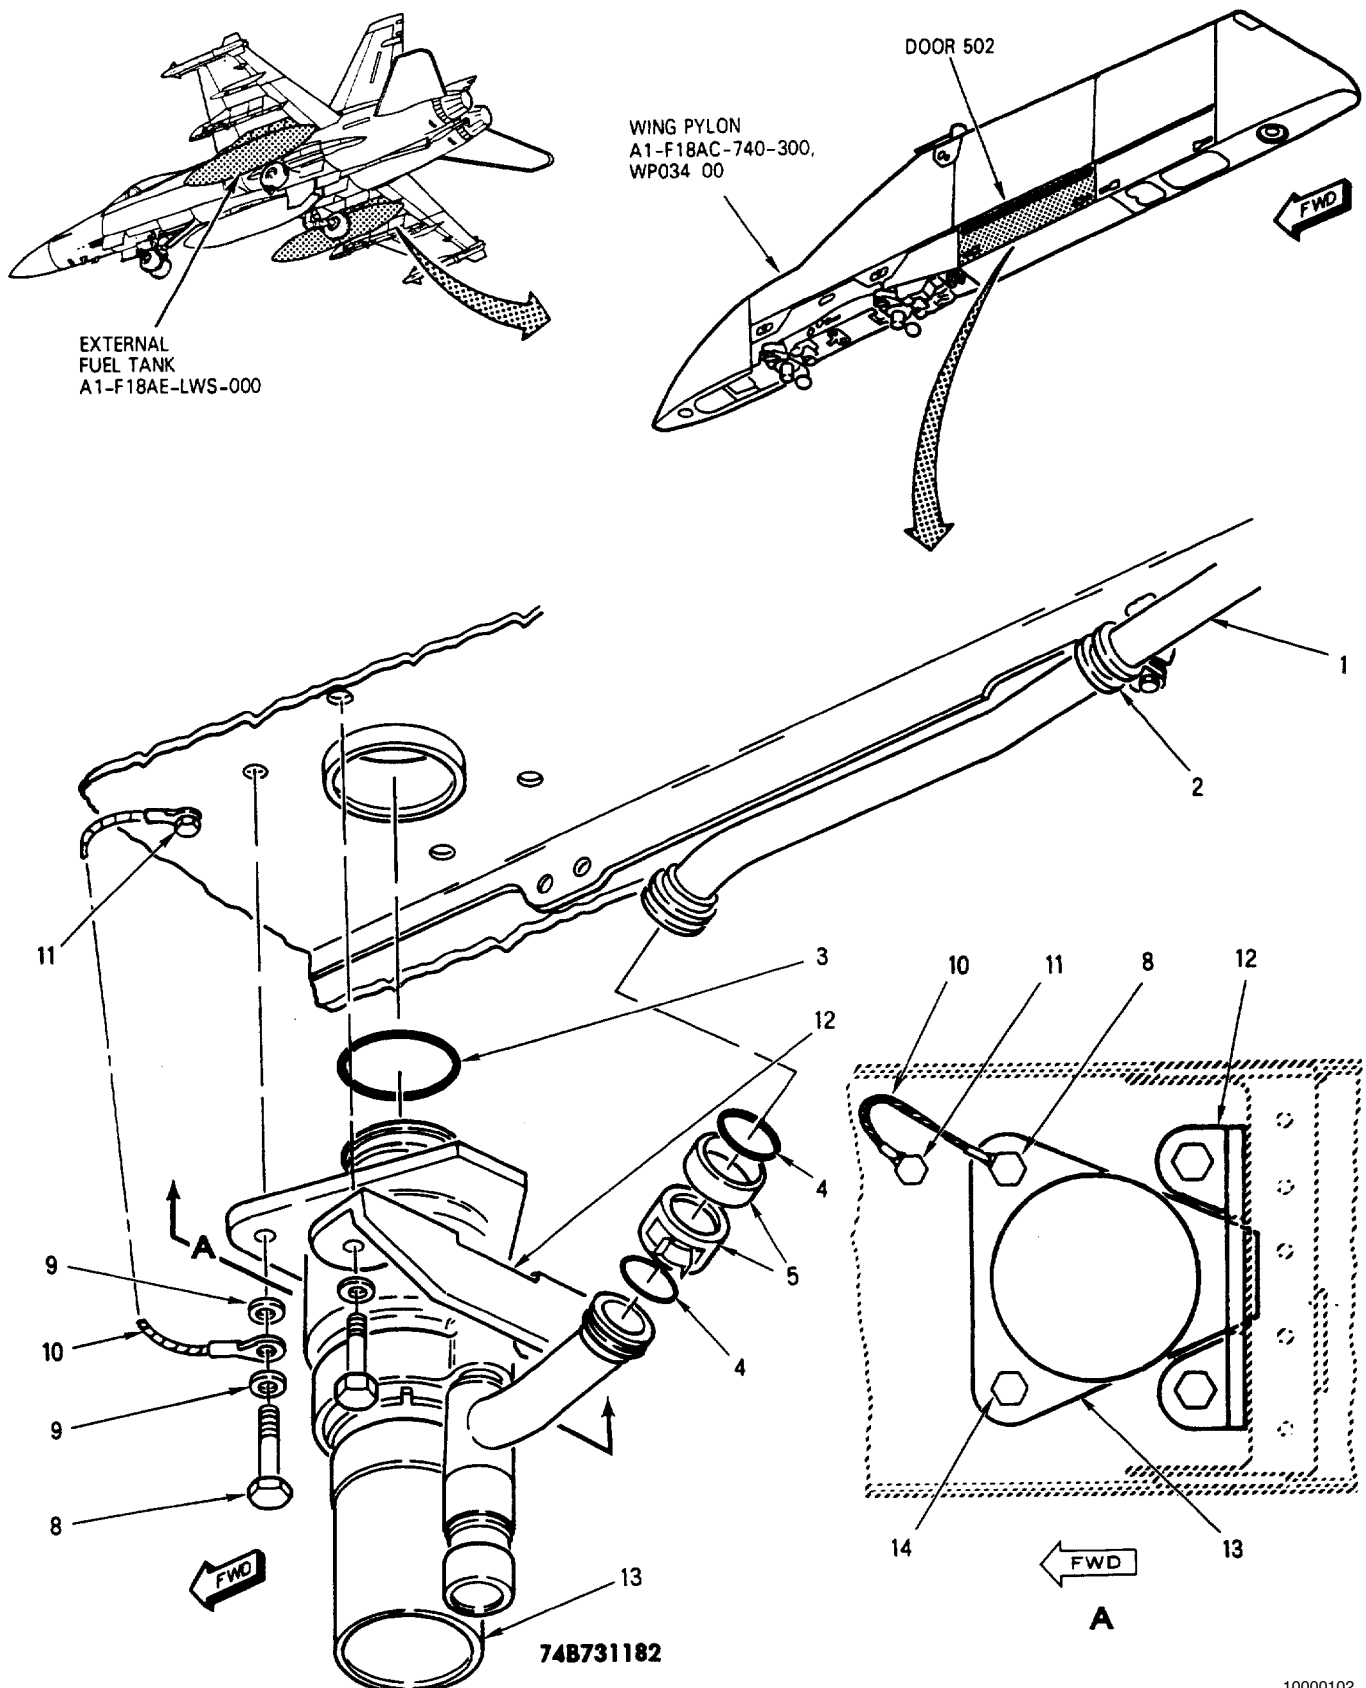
Wing Pylon To External Fuel Tank Fuel/Air Coupling Valve (5VAW623)
